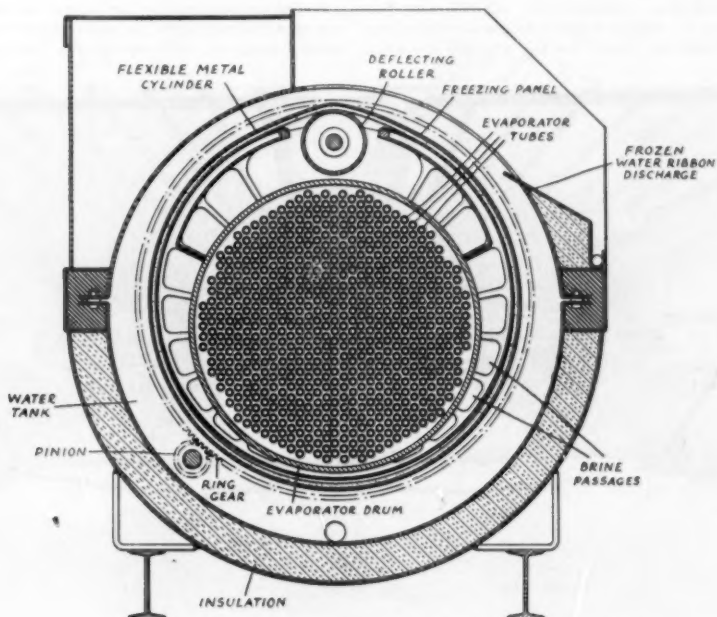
CROSS SECTION OF MACHINE SHOWN IN LONGITUDINAL SECTION IN FIG. 8
